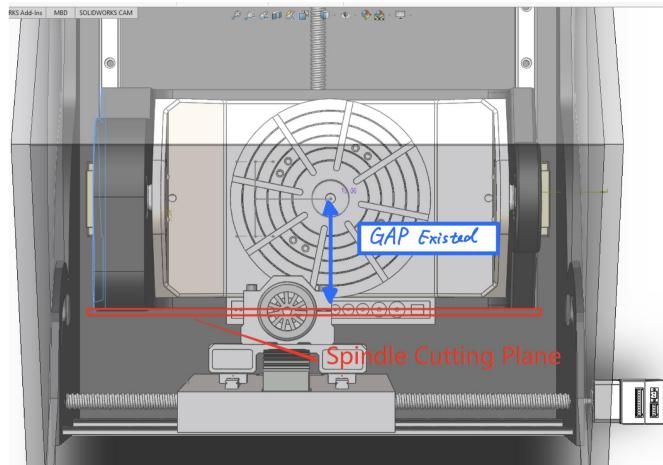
Top View of the Machine when Rotary Table is in the Nearest Position
